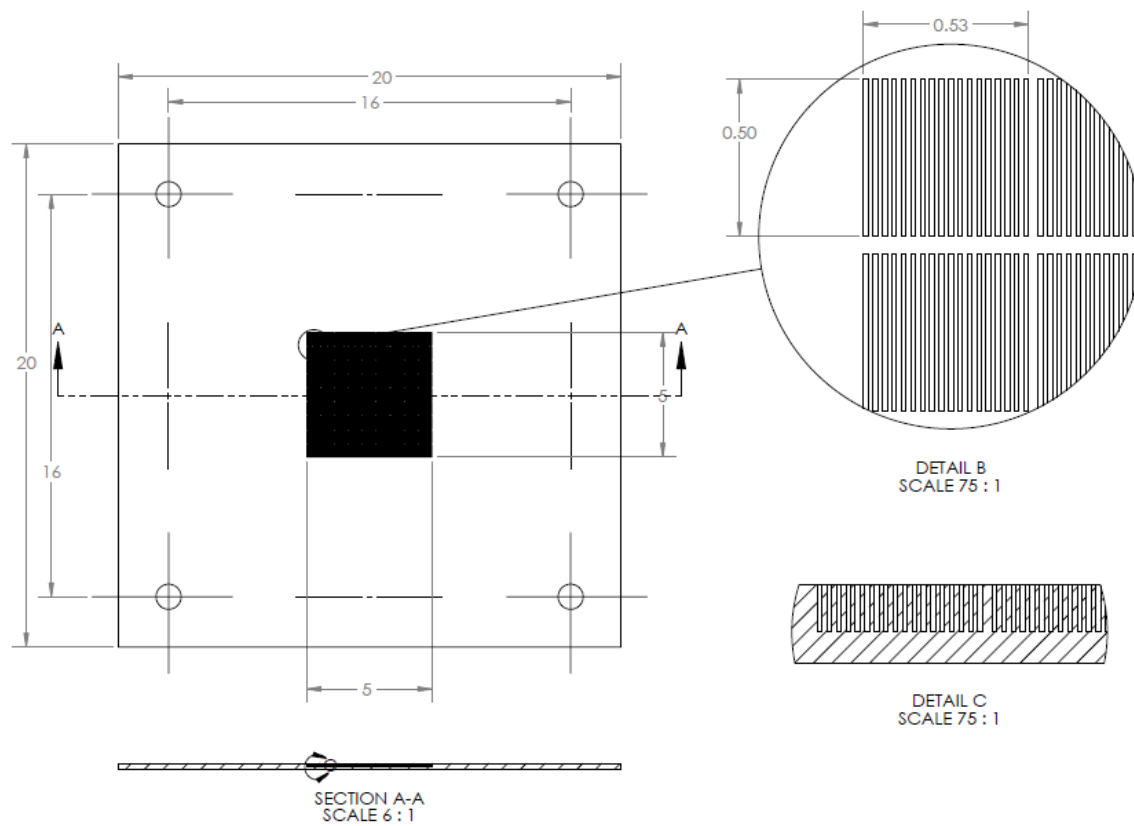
Technical drawing for the  $9 \times 9$  array of microchannel heat sinks. All dimensions in millimeters.
